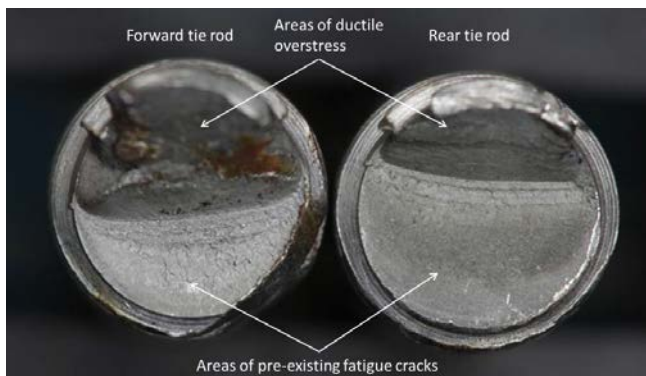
Fuselage Lateral Tie Rod Ends showing left side fracture faces.
